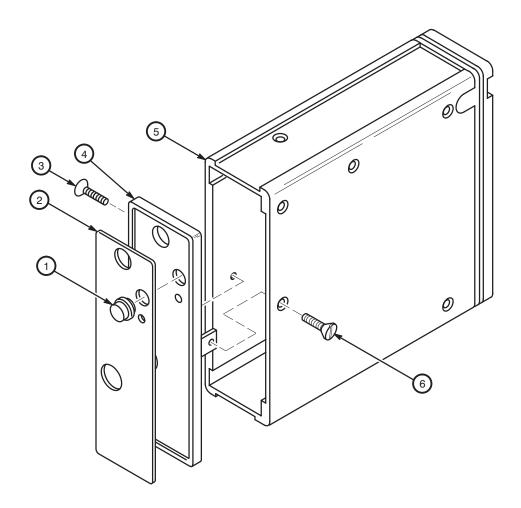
Exploded View of the SD-22 & SD-26 Sampling Heads
